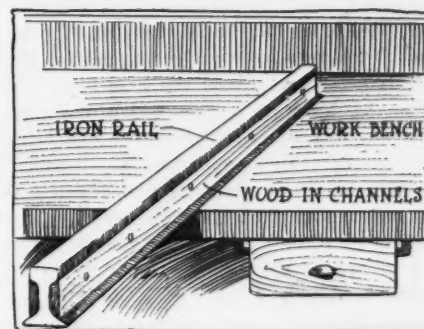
IRON RAIL USEFUL EQUIPMENT
